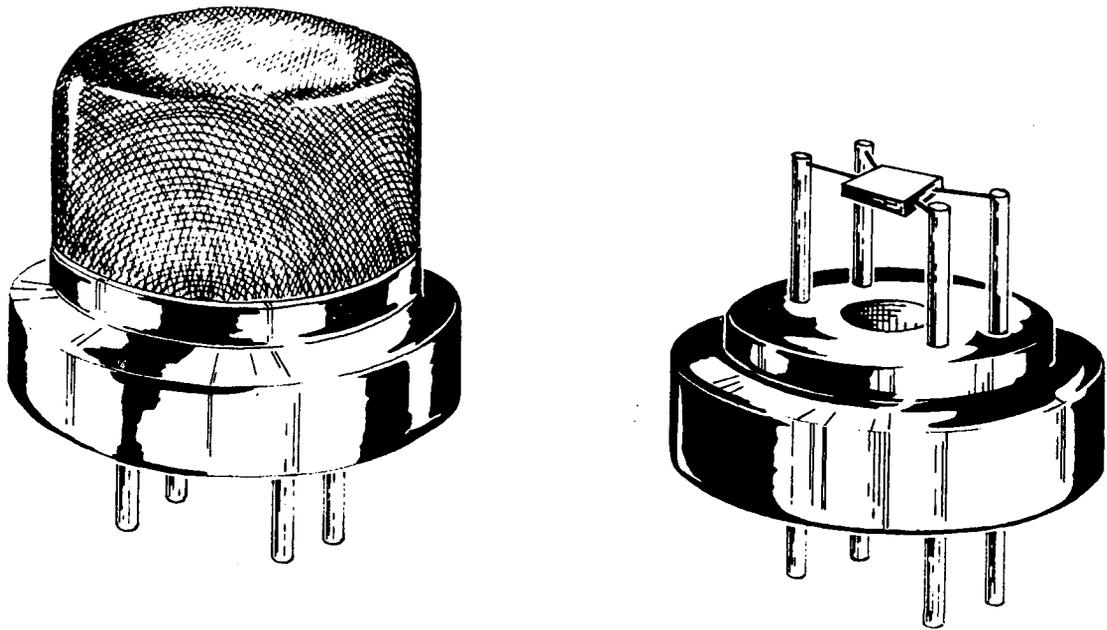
Two drawings of the Taguchi Gas Sensor (TGS) assembly: left drawing, TGS assembly with wire mesh safety cover in place; right drawing, assembly with this cover removed. Overall diameter of assembly about 1.8 cm. Note the tiny TGS supported by wires welded to the four connector terminals.
